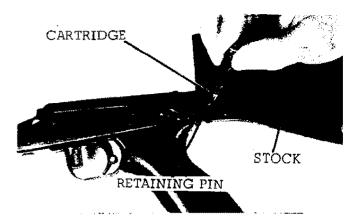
REMOVING THE STOCK RETAINING PIN
